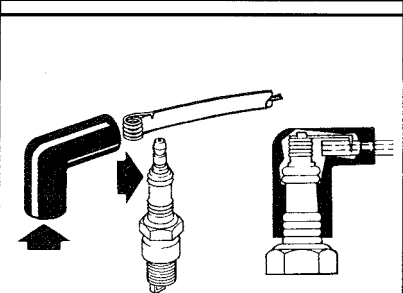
To prevent corrosion, apply a small amount of grease to the plug and boot during installation
